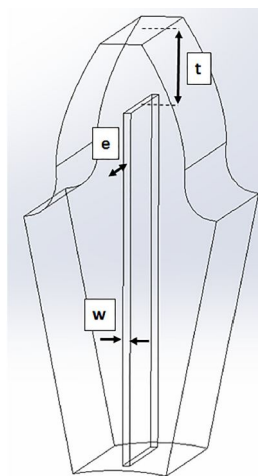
POM gear tooth with a rectangular block shape insert [4].
